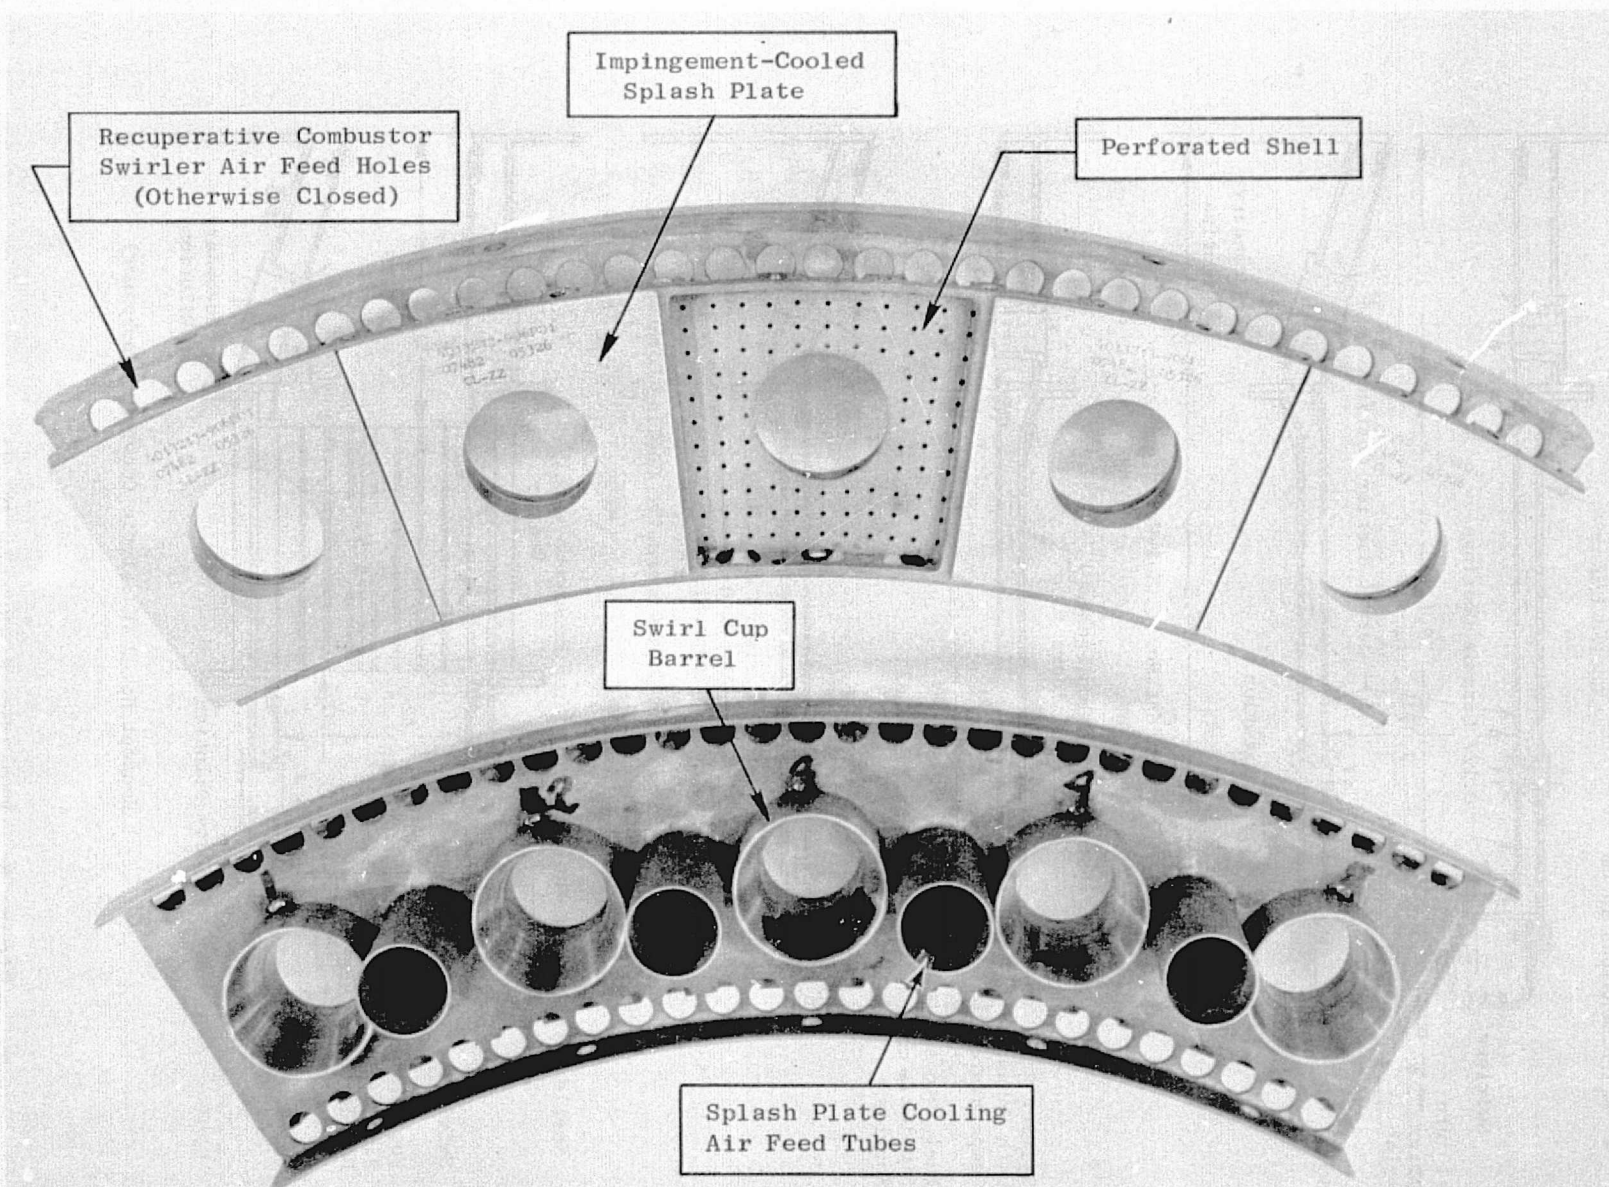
Common Dome Construction Details (Inlet Cowl and Swirlers Not Installed).
